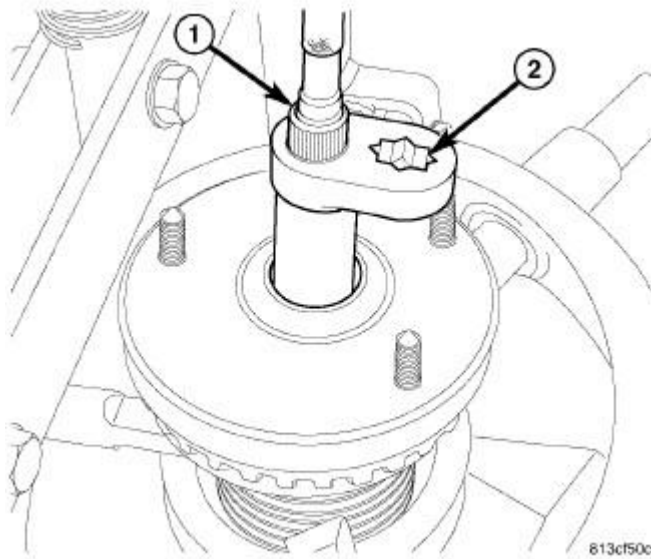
RETAINING NUT REMOVAL/INSTALLATION
